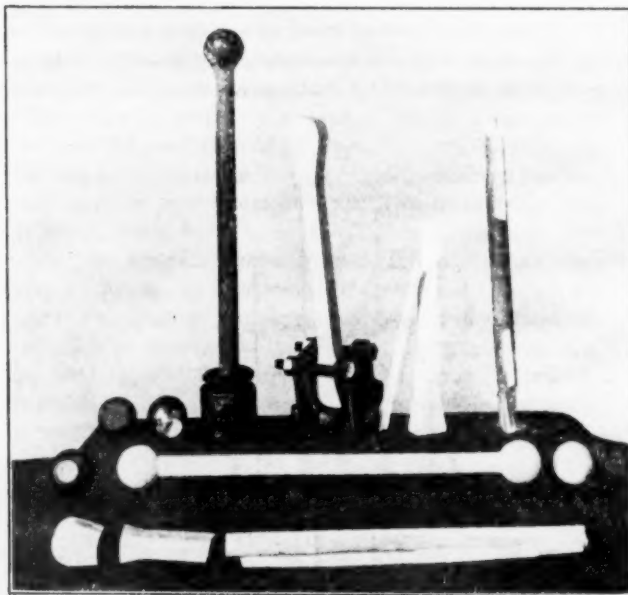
TEST PIECES, SHOWING GRIPS AND TYPICAL FRACTURES
